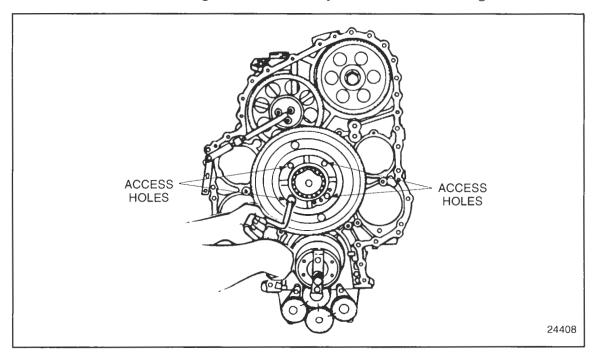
Removing Bull Gear and Camshaft Idler Gear and Hub
